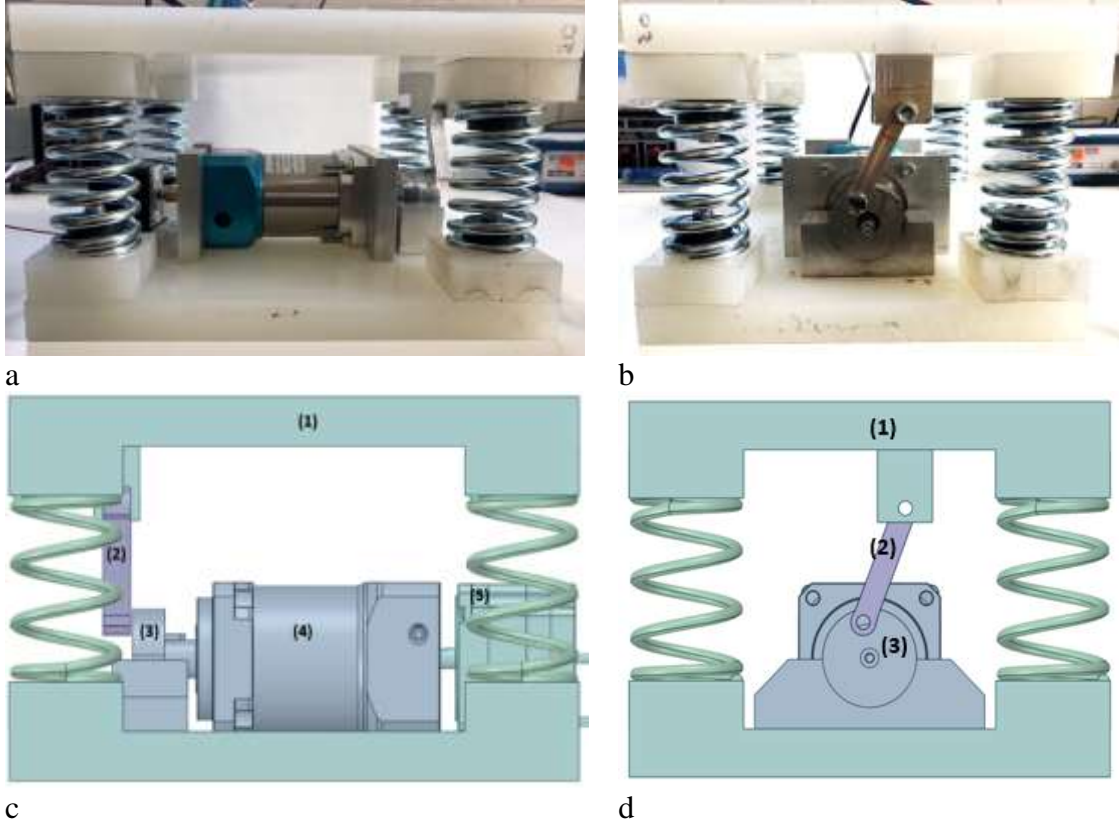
Mechanical harvester's model and the built prototype; a, c) side view; b, d) front view. (1):
